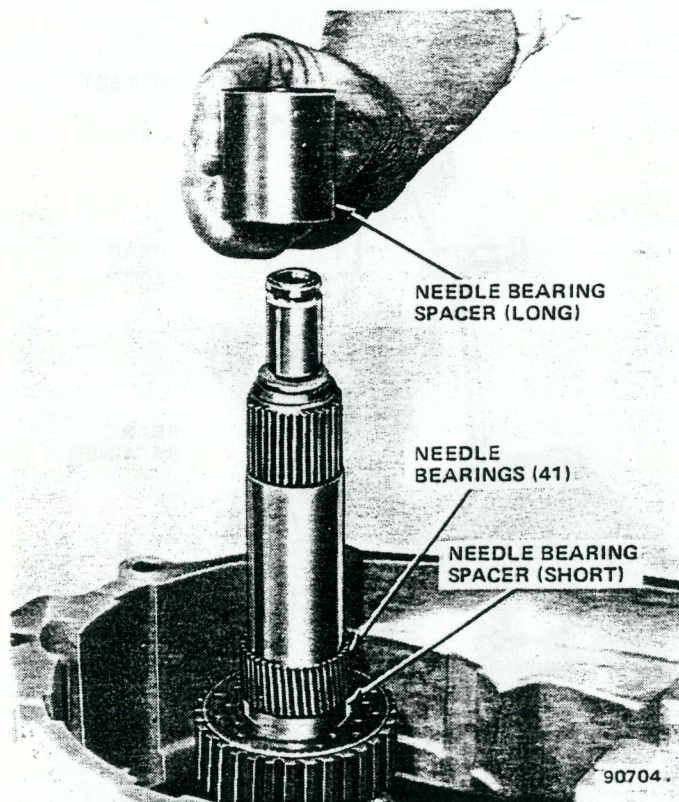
D-65 Mainshaft Needle Bearings and Spacer Installation
